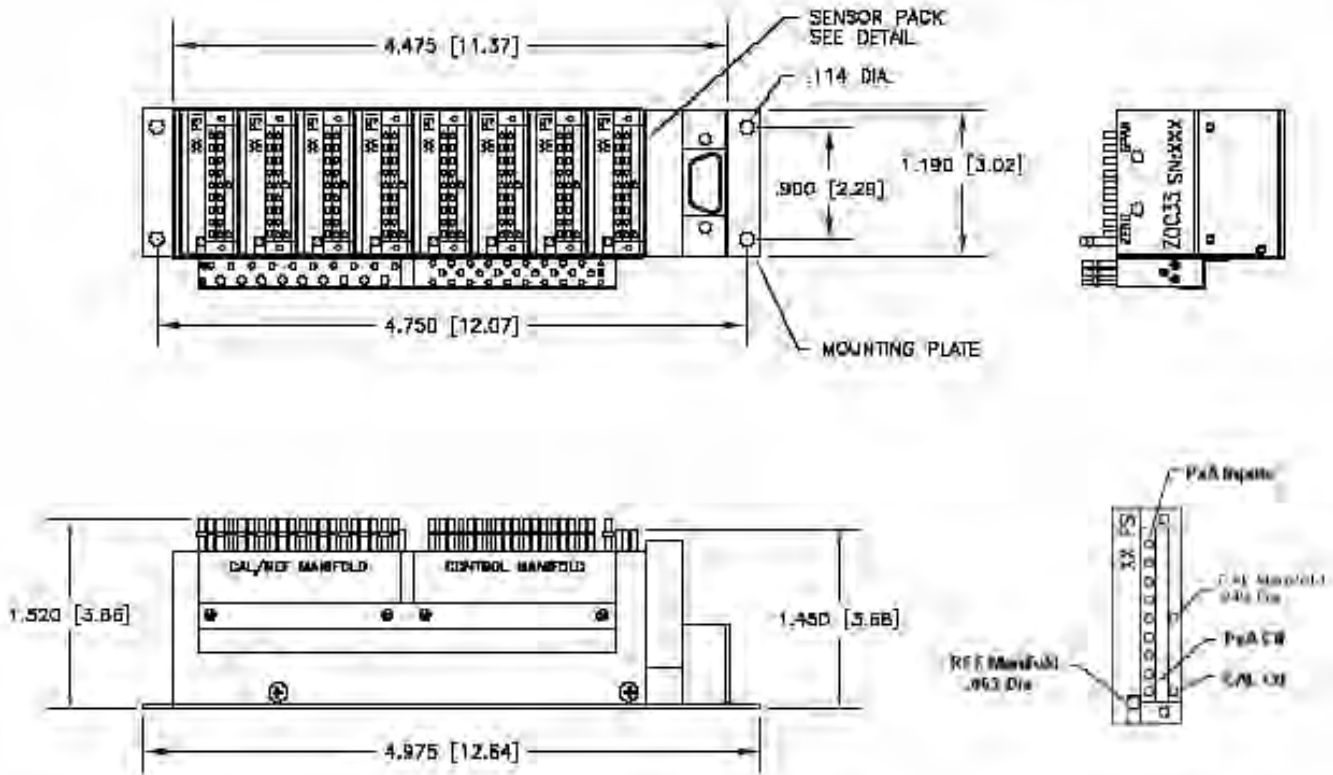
ZOC33/64Px DIMENSIONS [INCHES(CM)]
